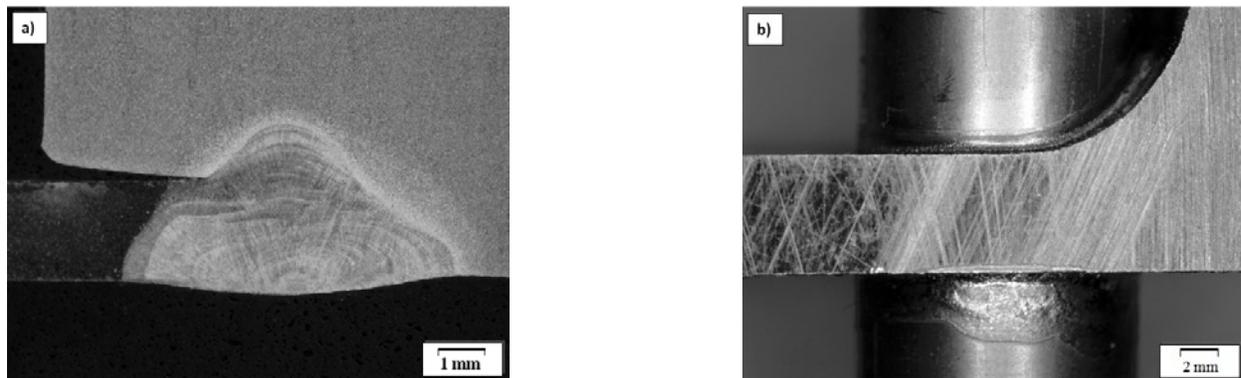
a) stereoscopic image of the welded joint b) stereoscopic image of the brazed joint
